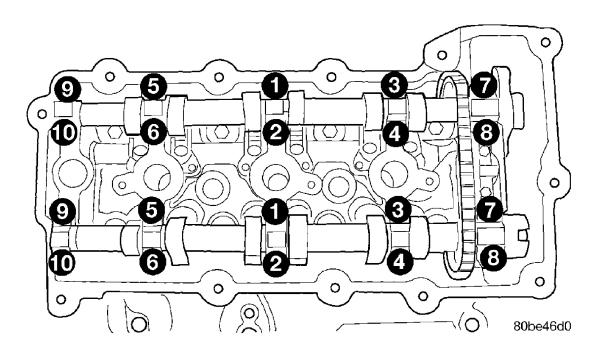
Identifying Camshaft Bearing Cap Tightening Sequence Courtesy of CHRYSLER LLC
